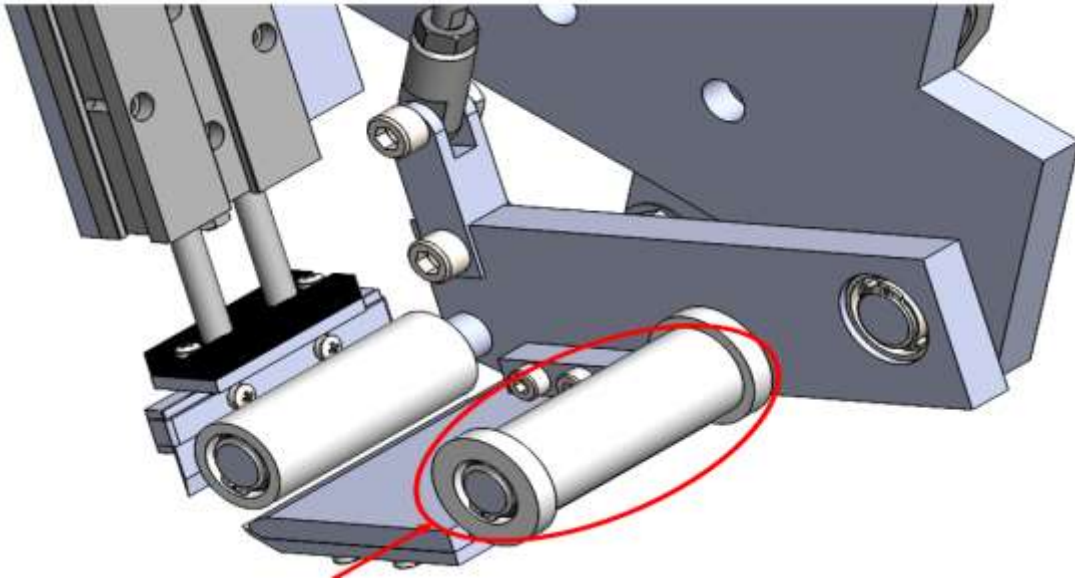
Tape guide roller selection for rotating unit in tape sticking mechanism
